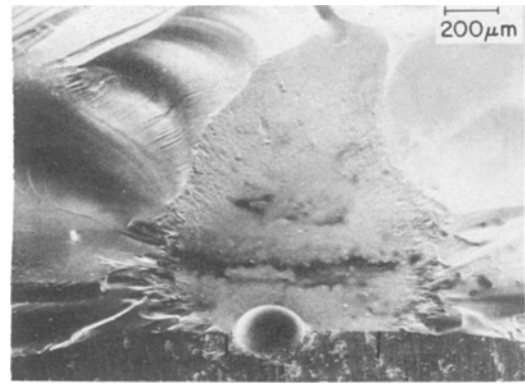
Failure of a germanate glass specimen from a flaw near the remainder of a large pore exposed by machining. The specimen failed from a flaw on the rounded edge shown in the lower right hand corner of the photo to the right of the pore, B. The failure-initiating flaw (arrow in (b)) and the failure stress of  $13.8 \times 10^3$  psi (95 MPa) give  $\gamma_a \sim 5 \text{ J m}^{-2}$ . Treating the pore as a semi-elliptical flaw gives a  $\sigma_p/\sigma_a > 3.3$ . Note that the ratio of mirror size to flaw size of approximately 15 is well within the range of typical values found for most glasses.
